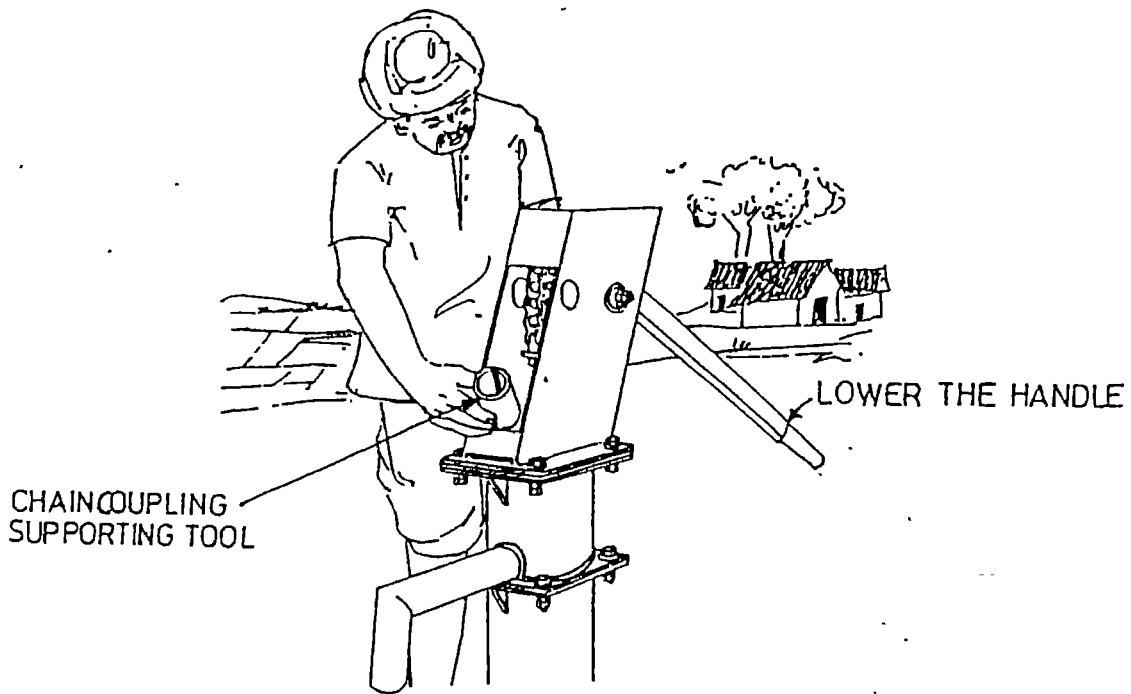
INSERT CHAIN COUPLING SUPPORTING TOOL
